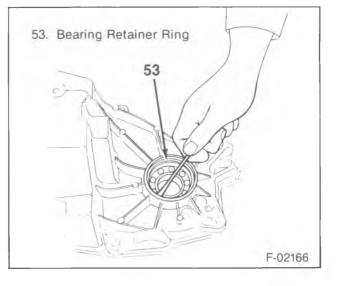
Front Output Shaft Front Bearing Retainer Ring Removal
